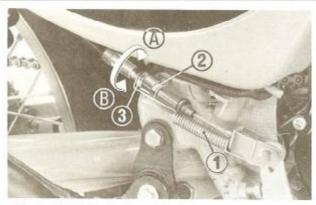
(1) Rear brake pedal spring (2) Lock nut (3) Brake cable adjuster
